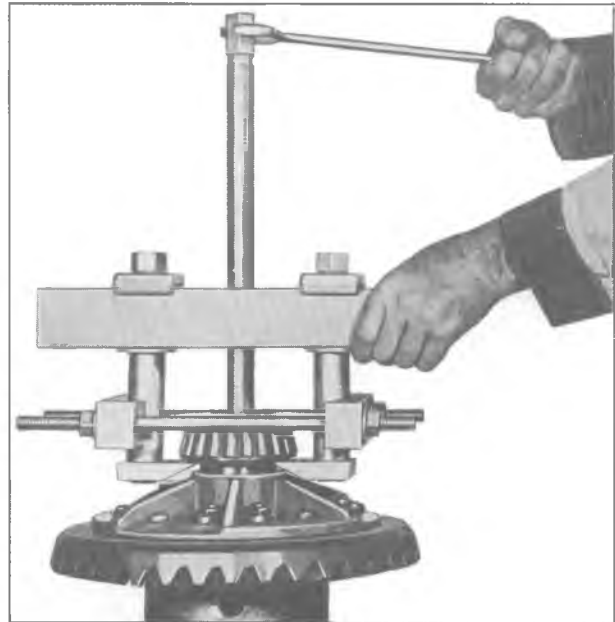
Removing Differential Bearing, Using Tool J-3493
